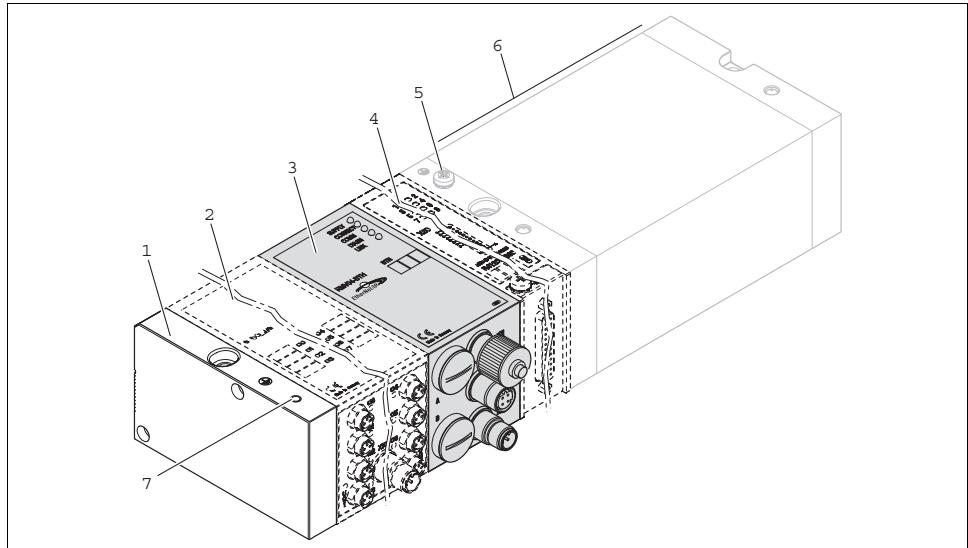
Bus coupler device overview with I/O modules and valve terminal (sample configuration)
